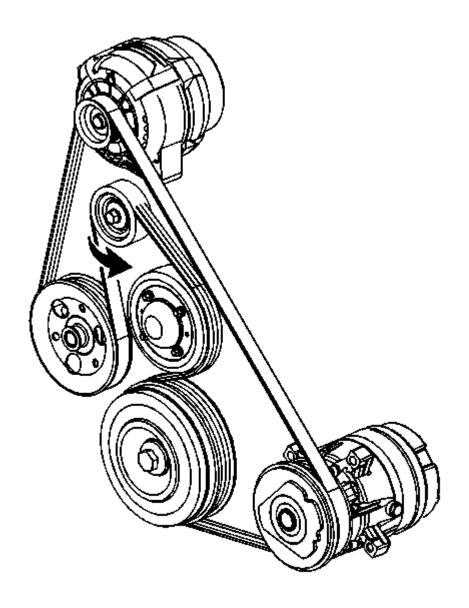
View Of Drive Belt Routing (L26) Courtesy of GENERAL MOTORS CORP.
